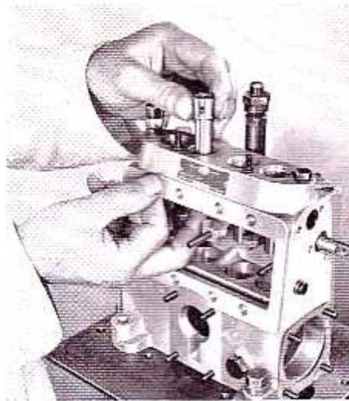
LIFTING OUT THE DELIVERY VALVE HOLDERS
